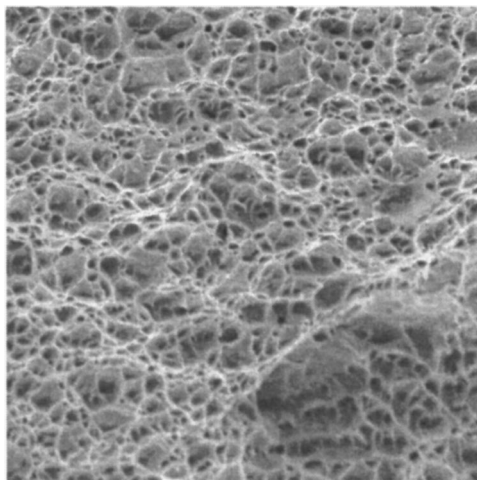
SEM fractograph (1000X) of a lap-shear sample: the circular dimple rupture microstructure indicating tensile fracture
